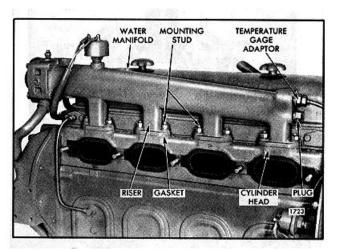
Typical Water Manifold Mounting Industrial Unit
